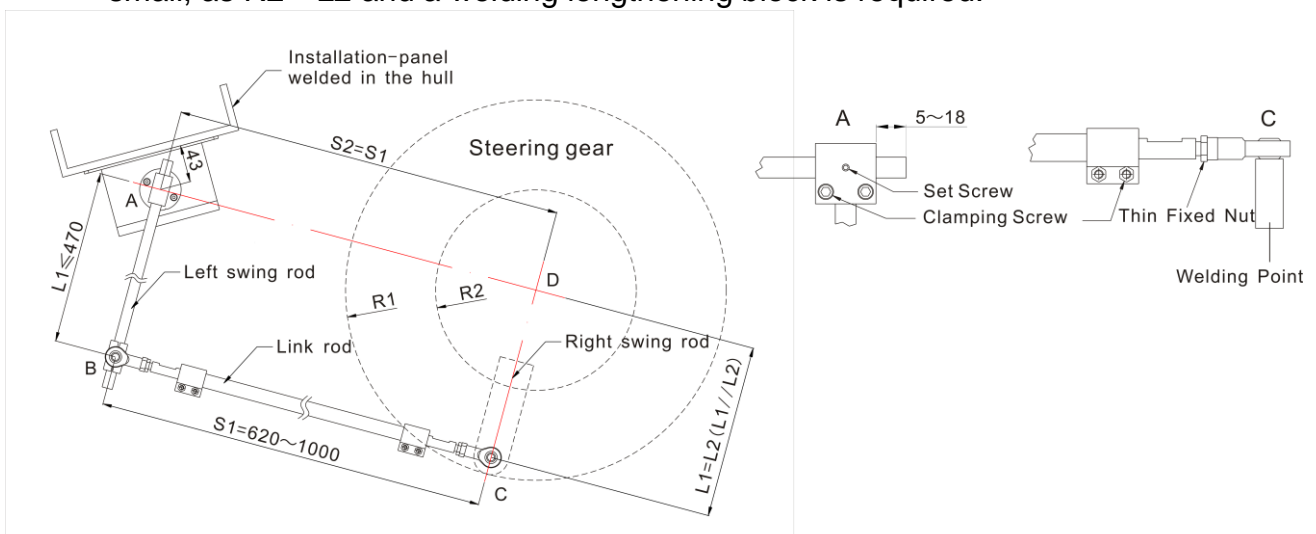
Installation of Rudder Angle Transmitter AD803-3
